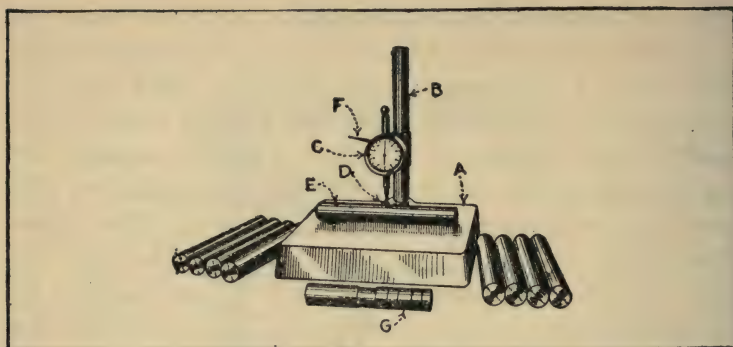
AMES DIAL TEST GAUGE ARRANGED FOR INSPECTION OF SHAFTS
